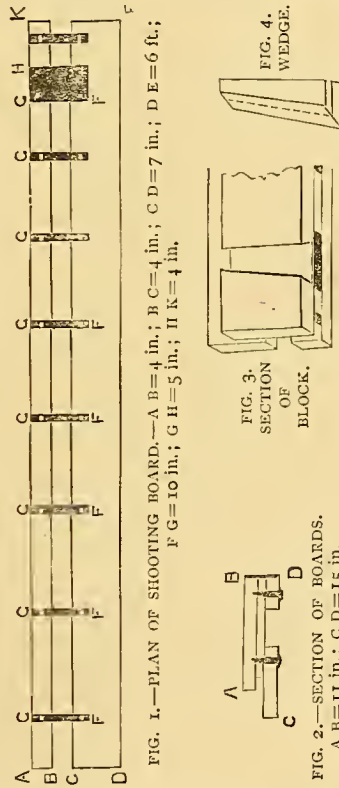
PLAN OF SHOOTING BOARD.—A B = 4 in.; B C = 4 in.; C D = 7 in.; D E = 6 in.; F G = 10 in.; G H = 5 in.; H K = 4 in.
